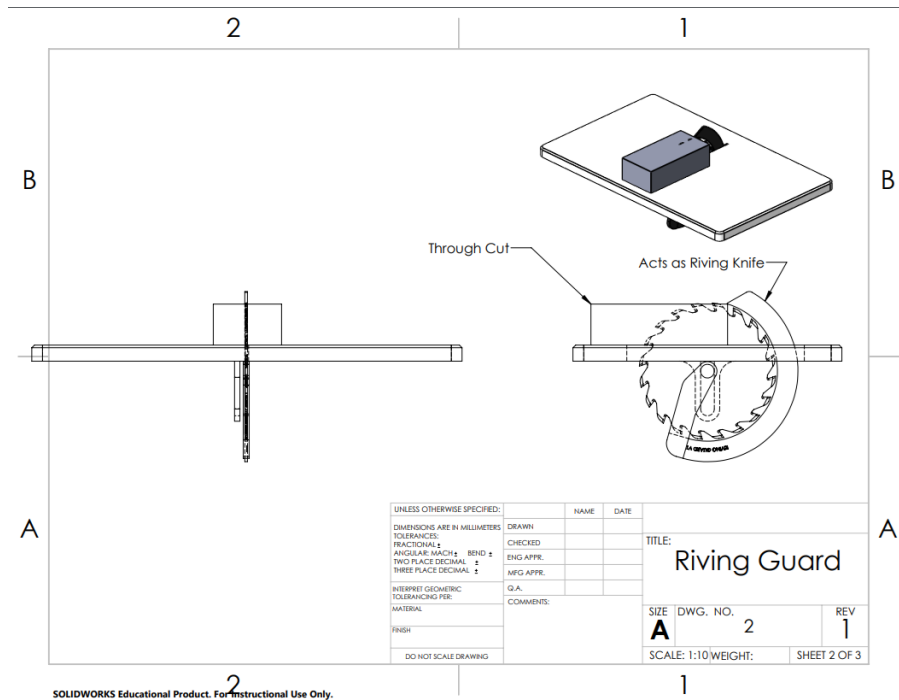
Technical drawing of the original drive shaft-mounted riving guard, displaying how the guard acts with through cuts.
